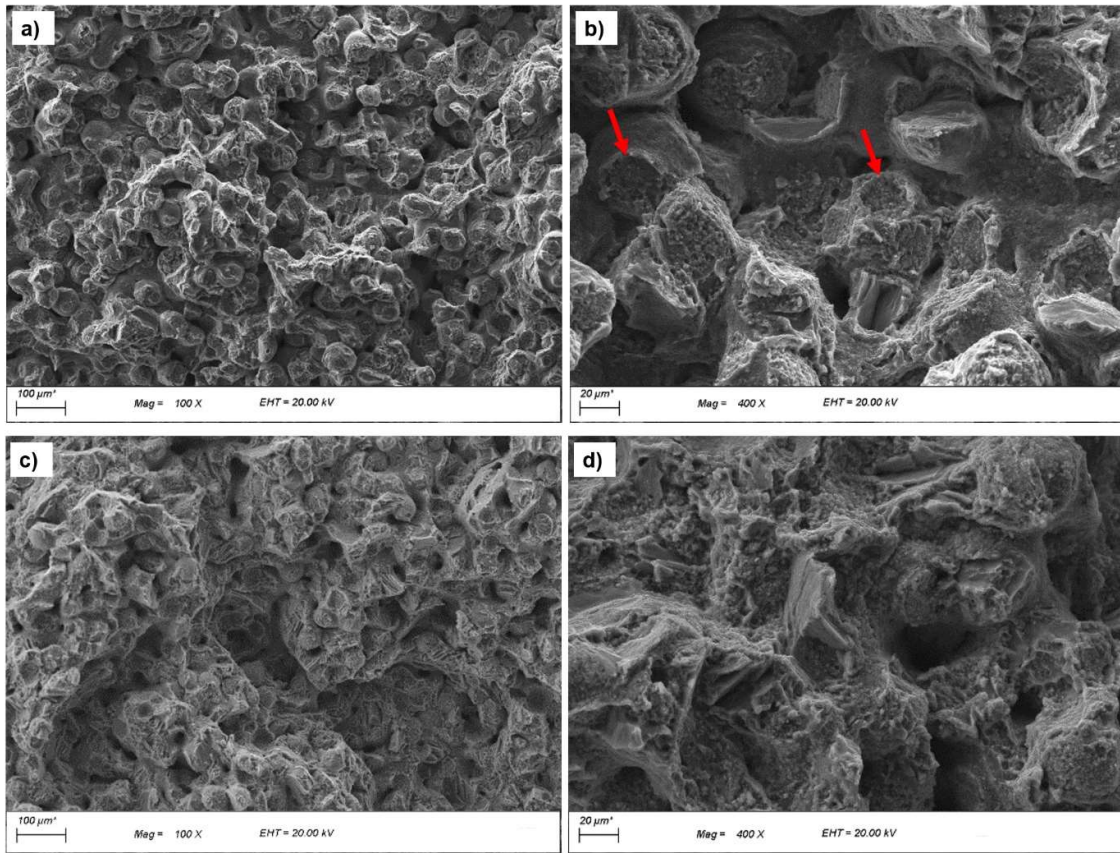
SEM images of the tensile fracture surface for binder jet-printed and sintered samples. a & b) Mg, and c & d) Mg-0.2 wt.% Ca.
